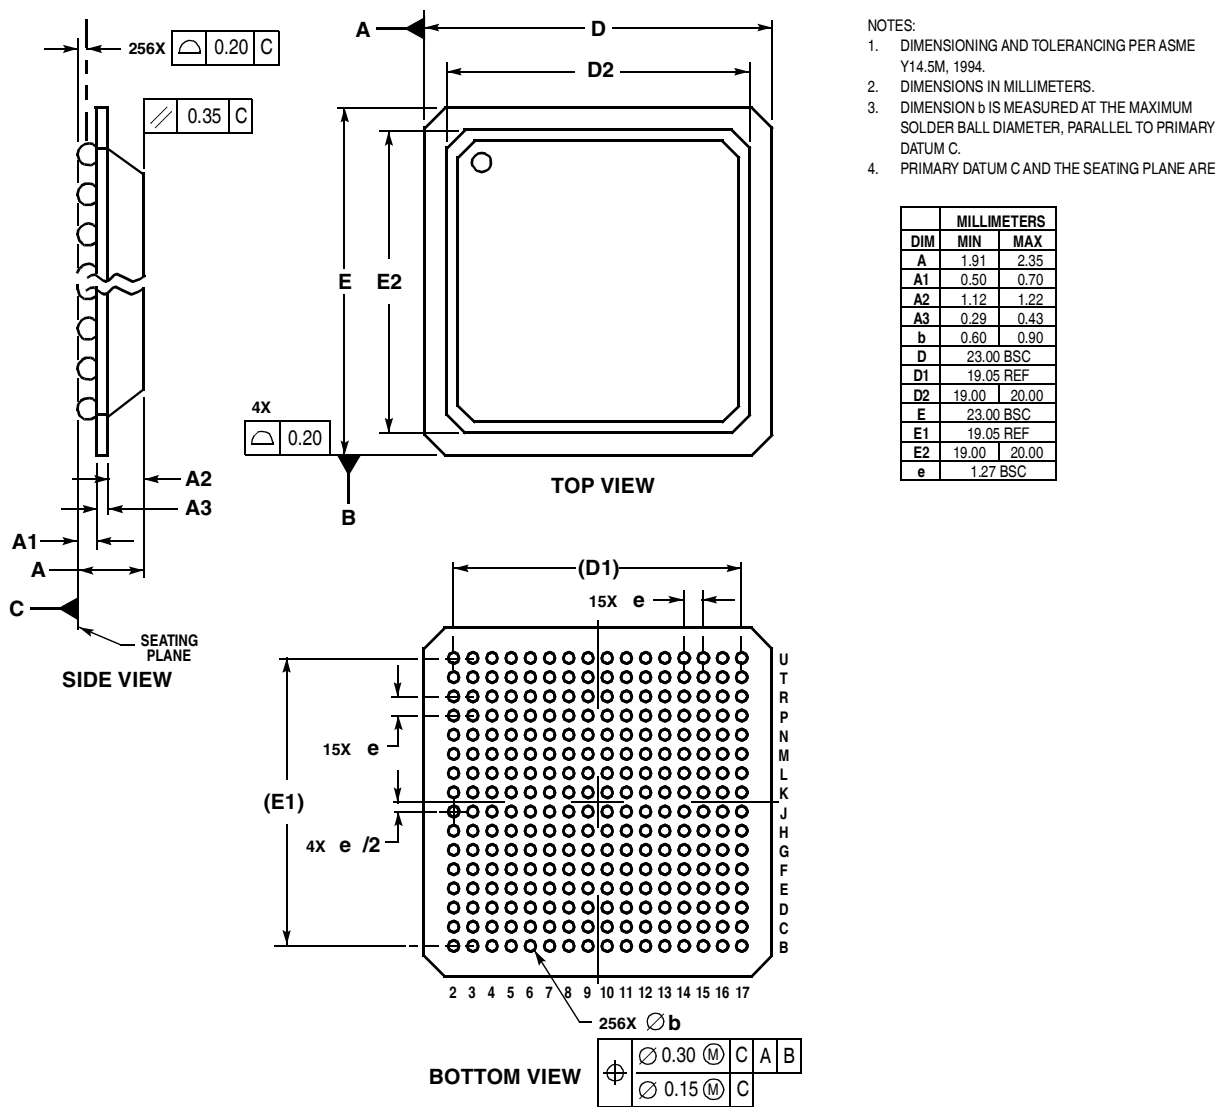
Package Dimensions for the Plastic Ball Grid Array (PBGA)—JEDEC Standard
